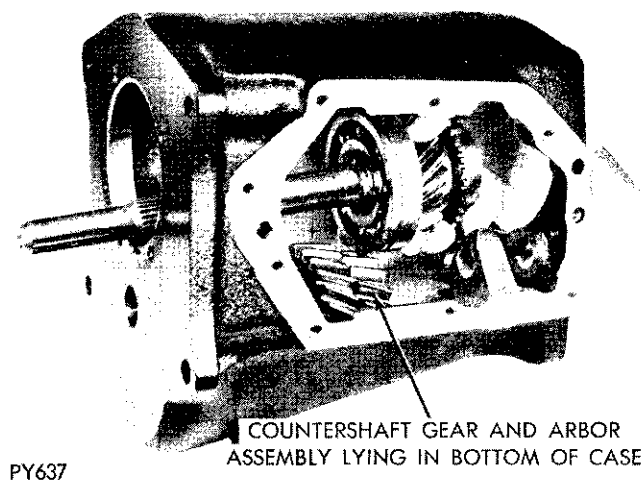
Drive Pinion and Bearing Assembly—Removal or Installation
